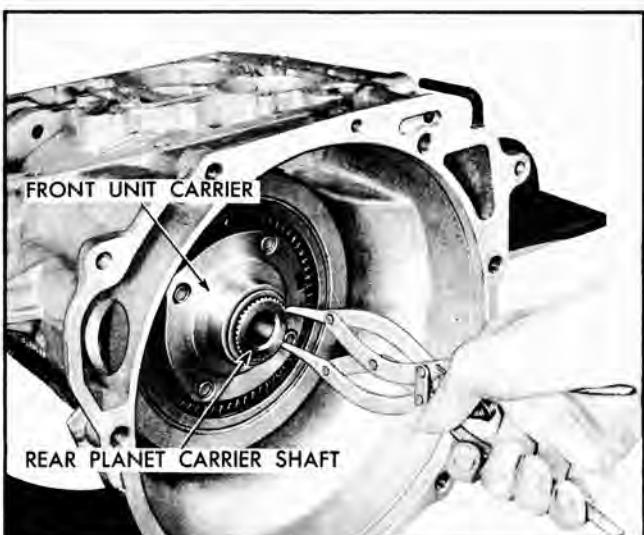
Installing Front Carrier to Rear Carrier Shaft Snap Ring
